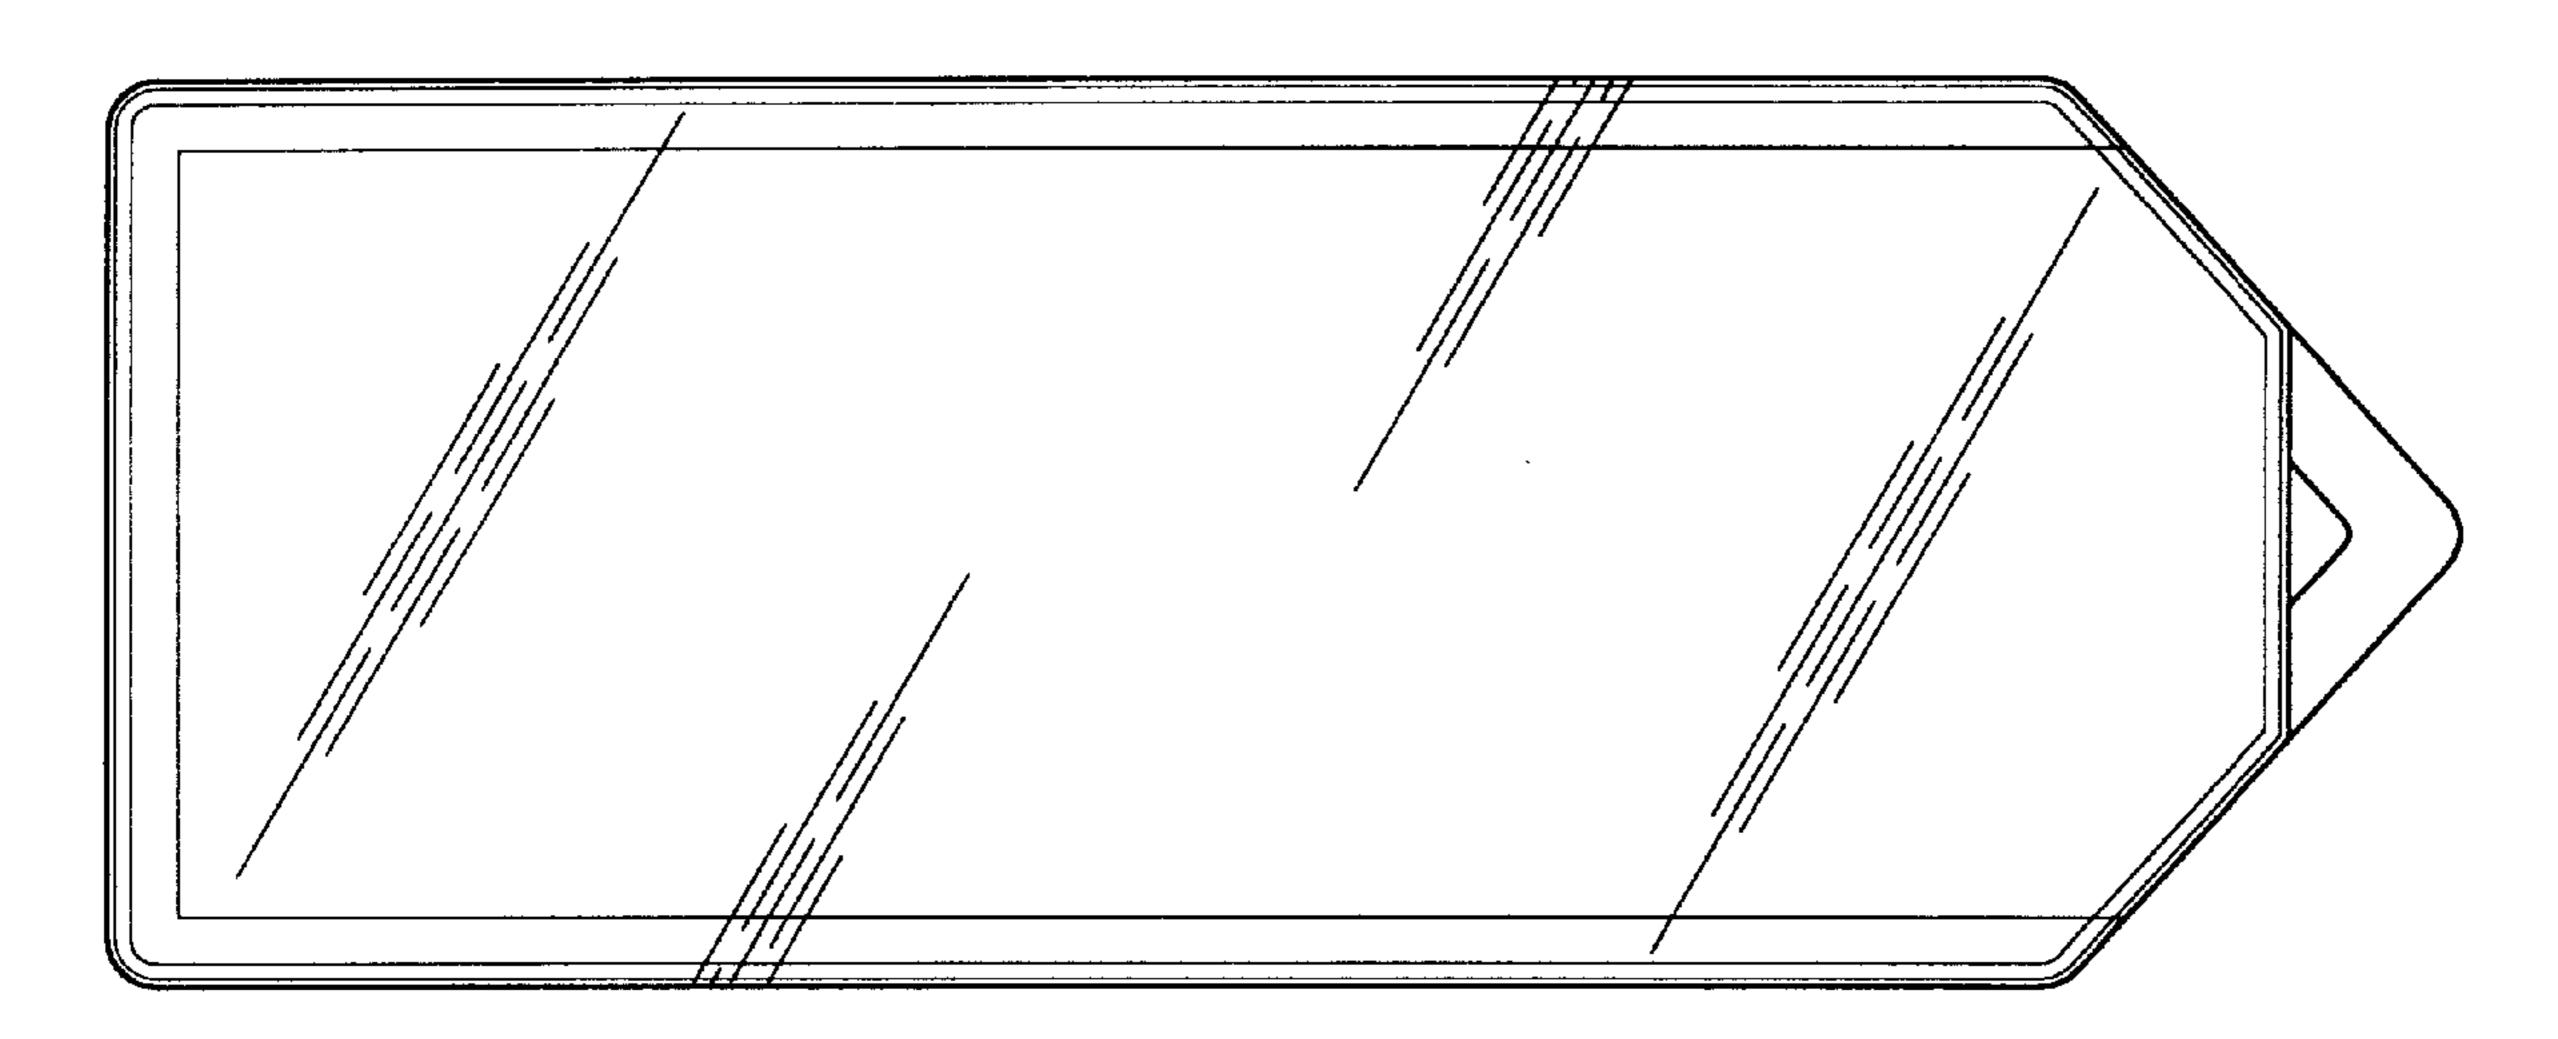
is an elevational view of the top of the ticket holder device with the front plate facing upwardly;
